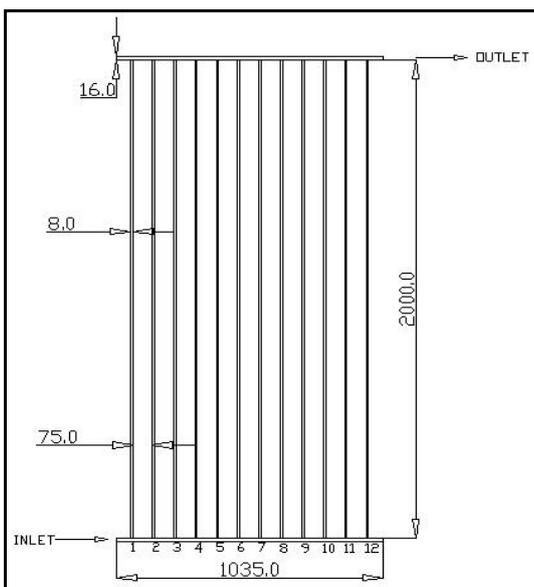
Sectional view of 12 numbers riser tubes, flat plate collector.
